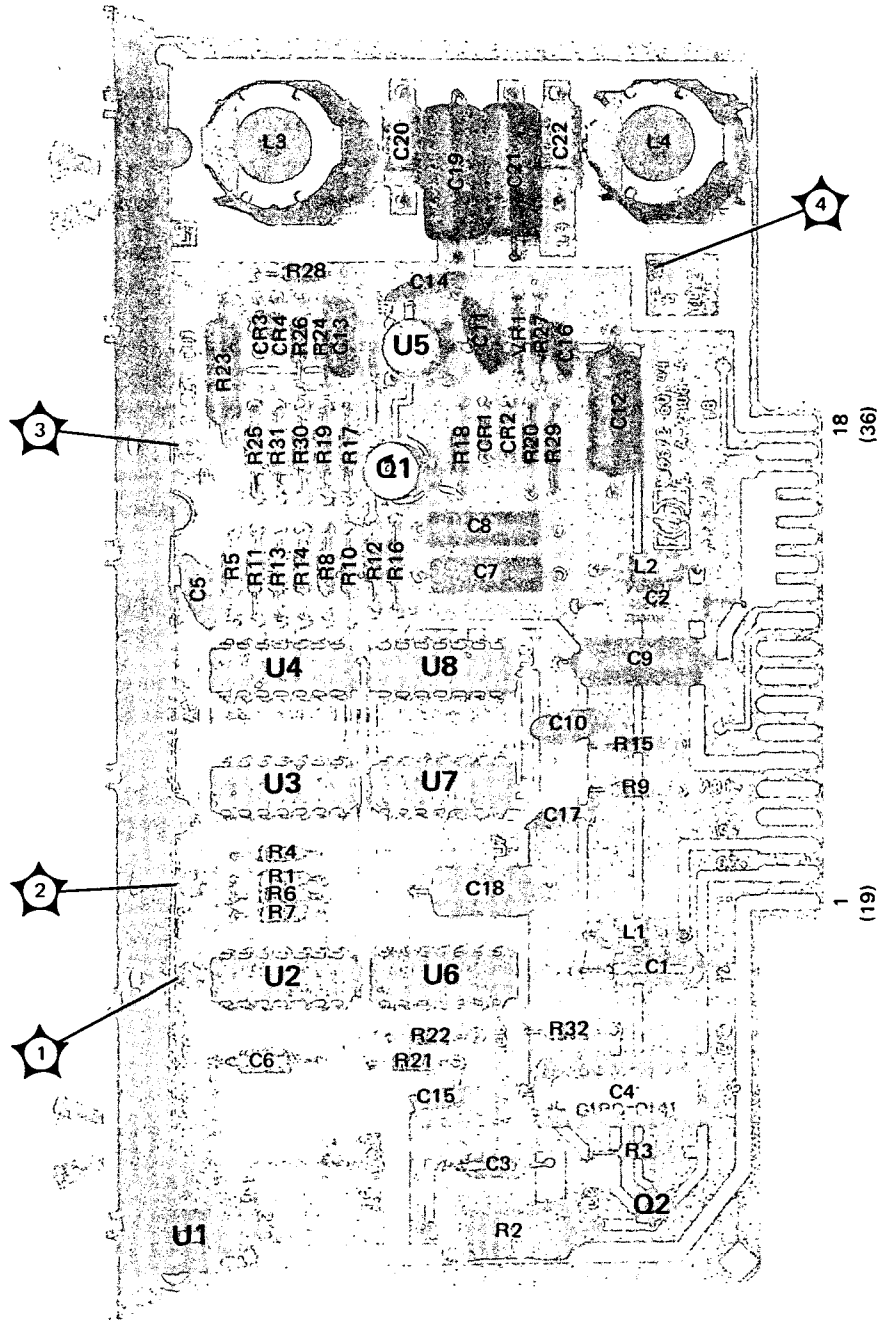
A2A4 20//30 Phase Detector Assembly Component and Test Point Locations
